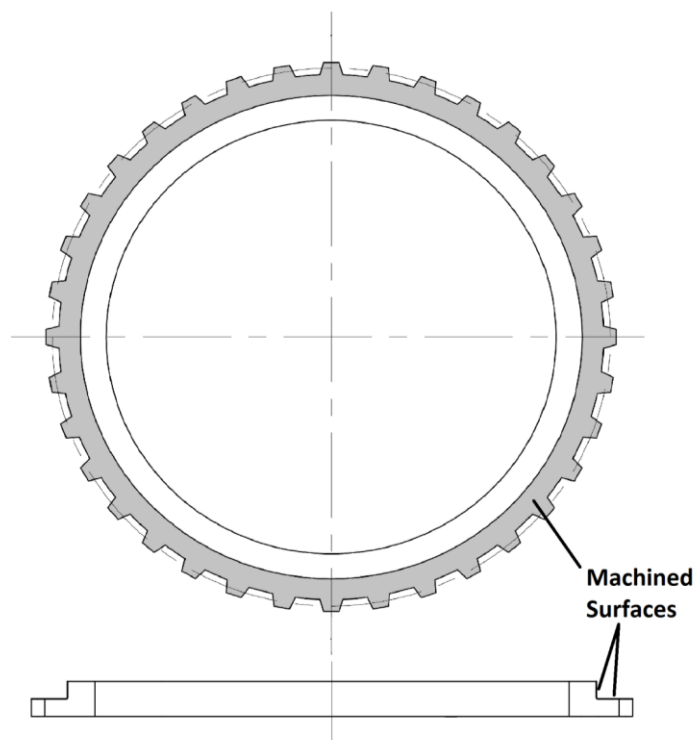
CNC machined part geometry, showing machined surfaces
